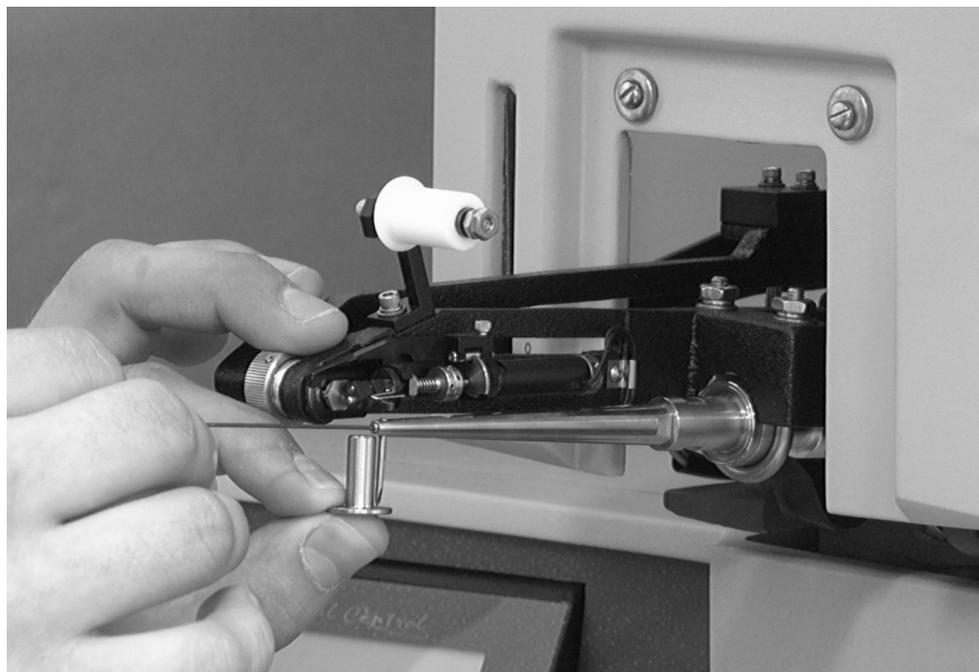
Wedge Installation Using the Setup Gauge - 4523D, 4523AD with Vertical Wire Feed, 0.828" Drop
